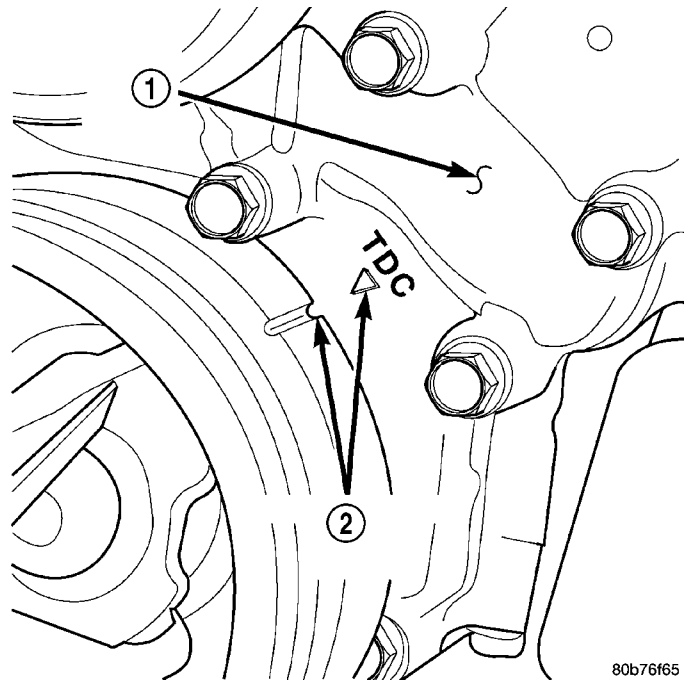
Engine Top Dead Center (TDC) Indicator Mark
